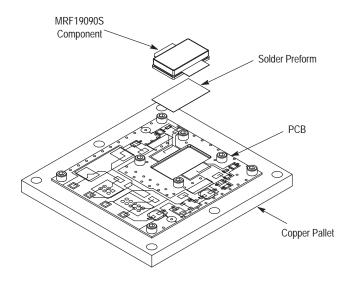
MRF19090S 90–Watt Power Device Board Construction
